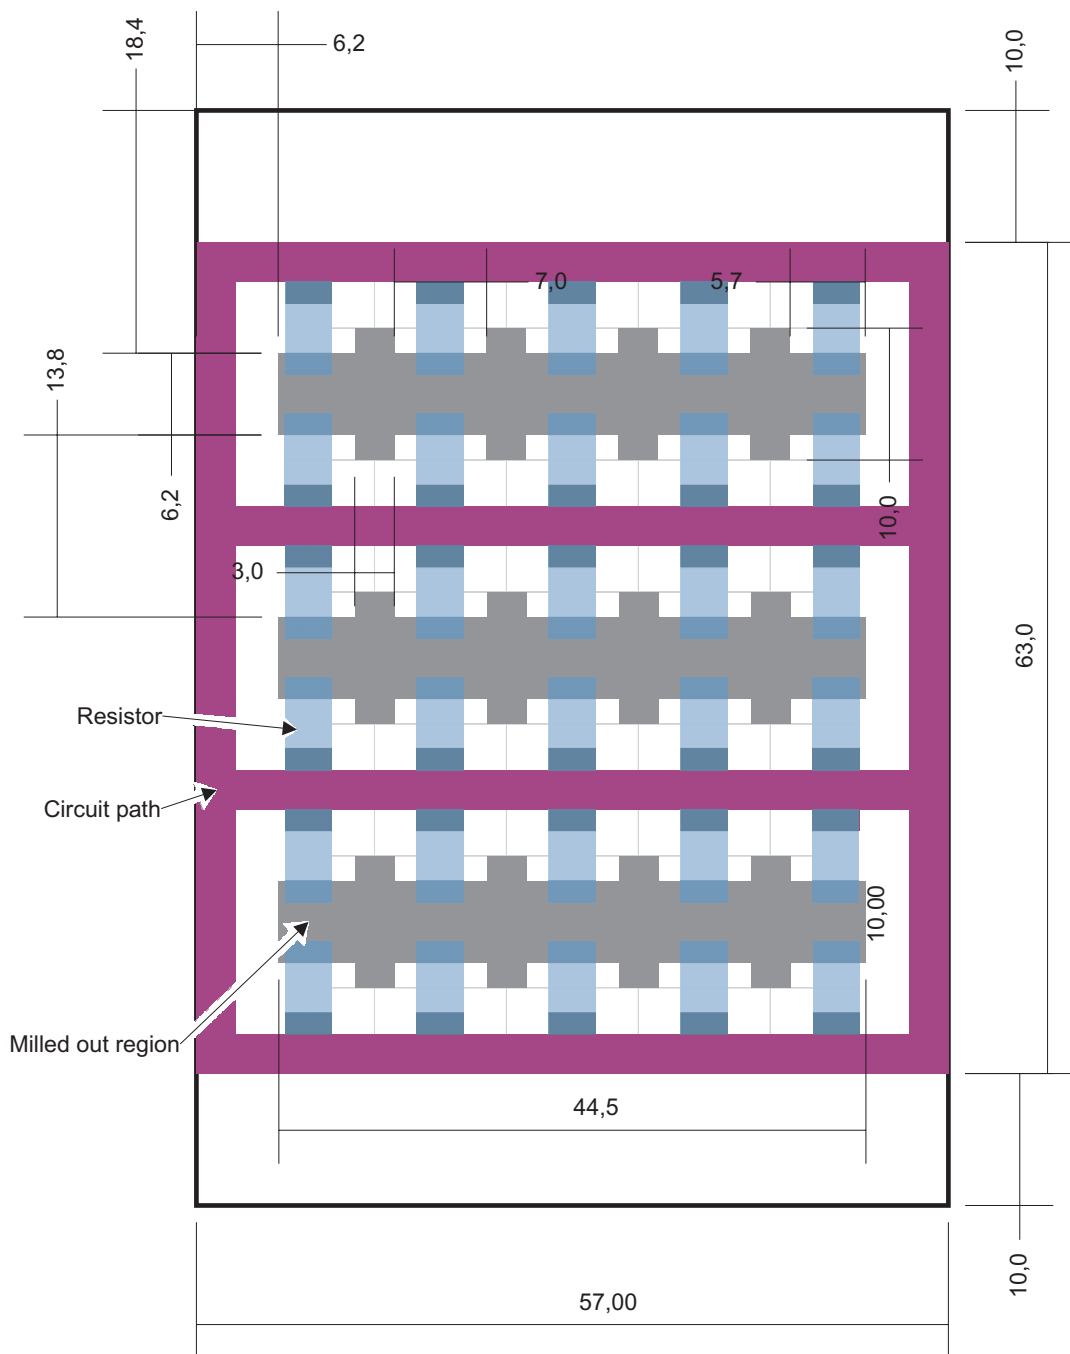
Circuit board for built liquid cold plate. The 0.2 mm thick substrate was milled to allow one terminal of each resistor to be soldered directly to the copper base plate.
